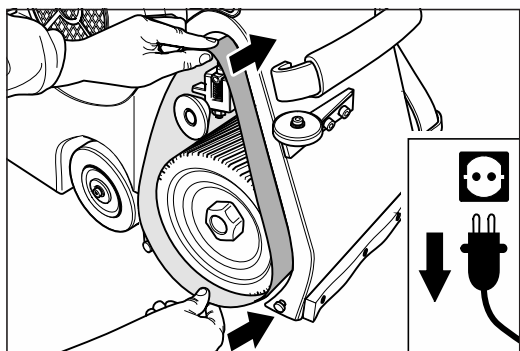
Push the sanding belt over the tensioning roller and sanding drum. Similar to figure.
